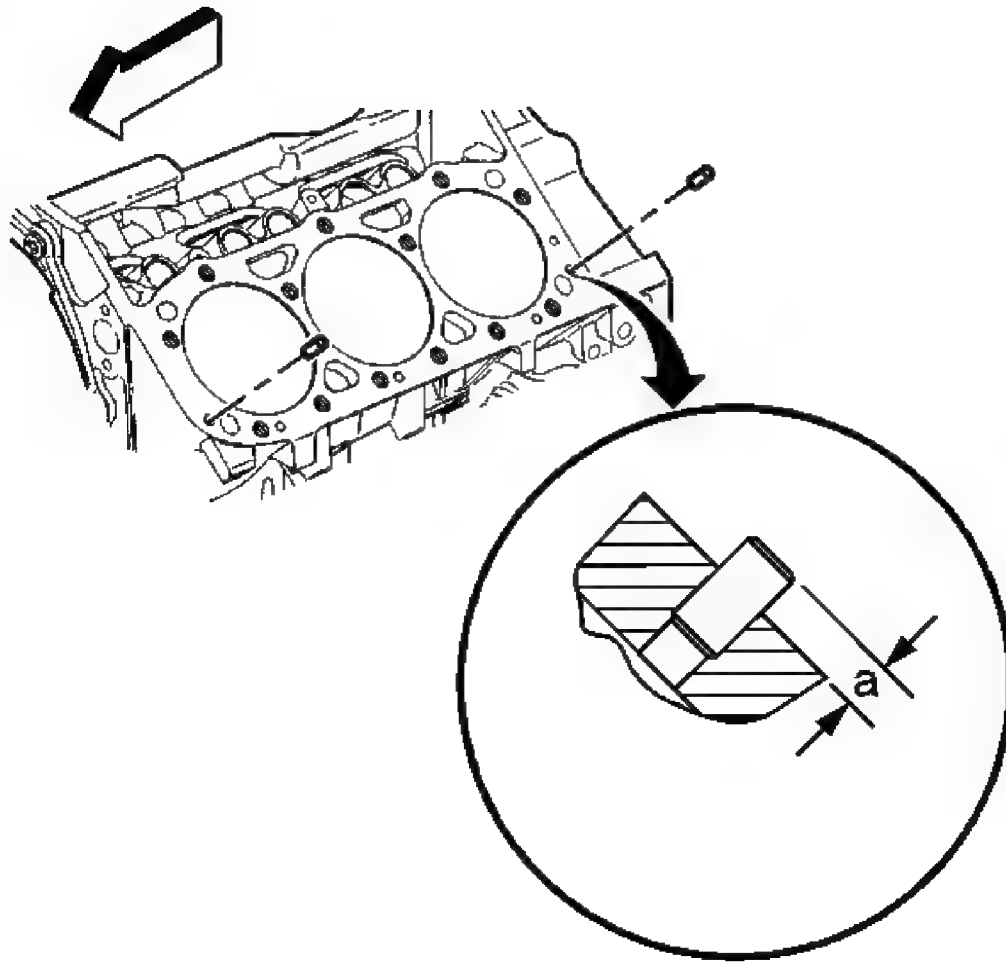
Locating Left Side Cylinder Head Locator Dowel Pins
